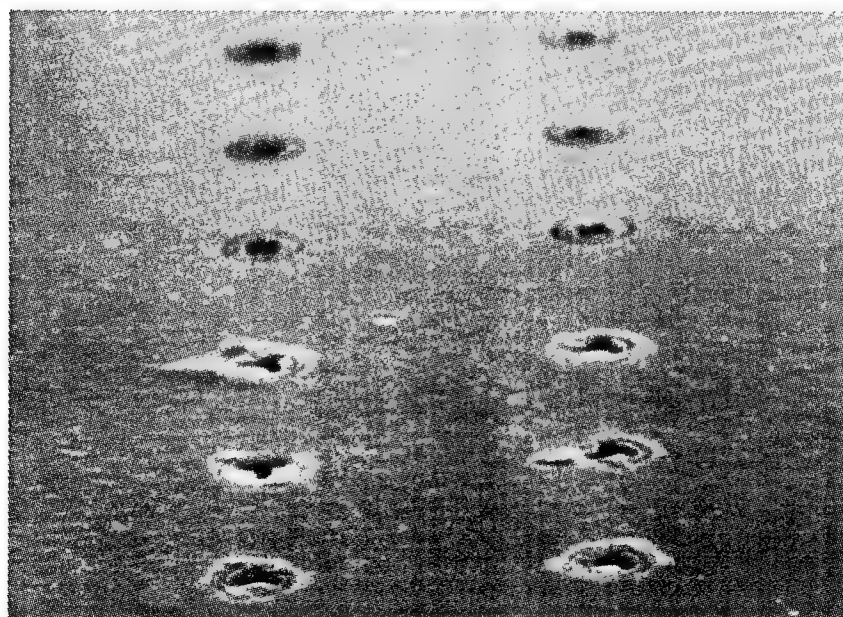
D Sight image of an aluminium alloy skin with two sets of fasteners. The six lower fasteners precipitated galvanic corrosion which is quite visible under D Sight.
